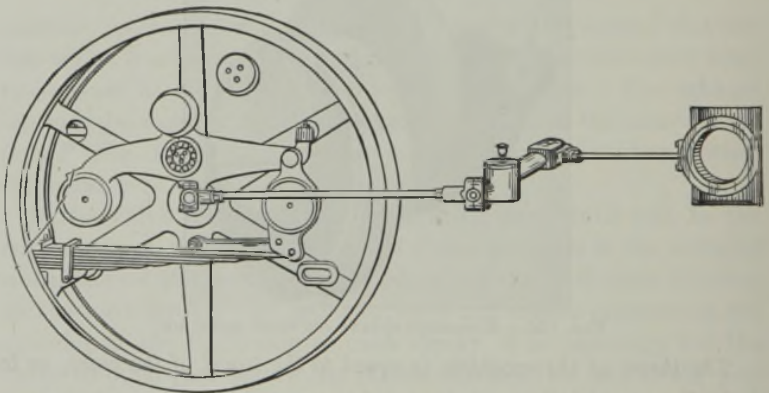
Governor, eccentric rod, rocker shaft, valve stem and valve.
